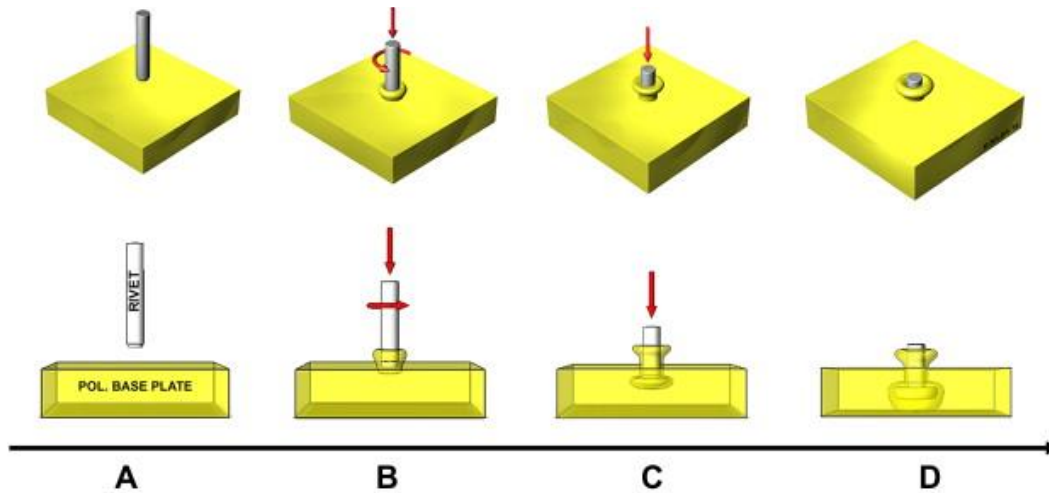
FricRiveting process A) Positioning and clamping of joining partners B) Insertion of rotating rivet into the polymeric base plate C) Rivet forging and D) Cooling and joint consolidation [22]
